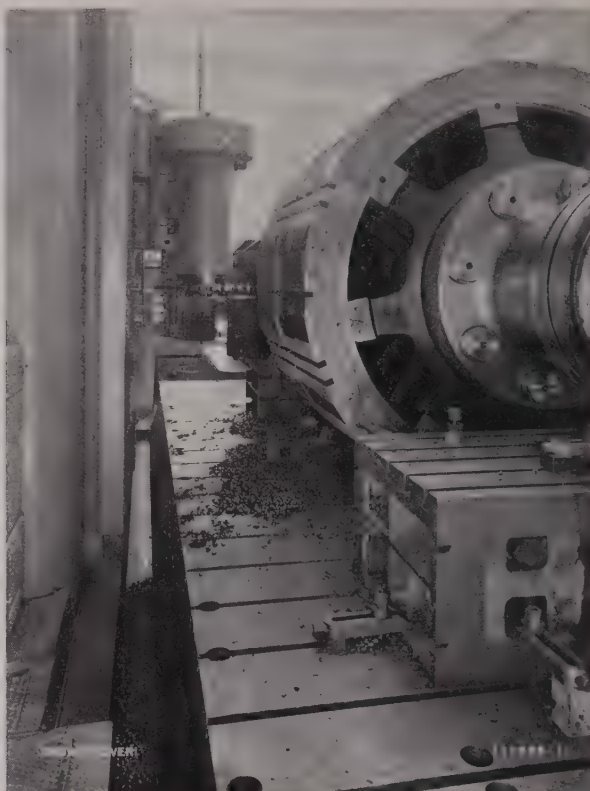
Large milling and boring machine being used for the stator of a hydro-electric generator
